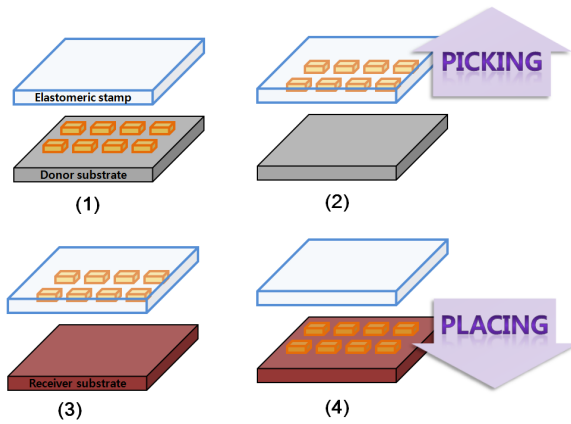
A schematic of transfer assembly process⁽²⁾.
